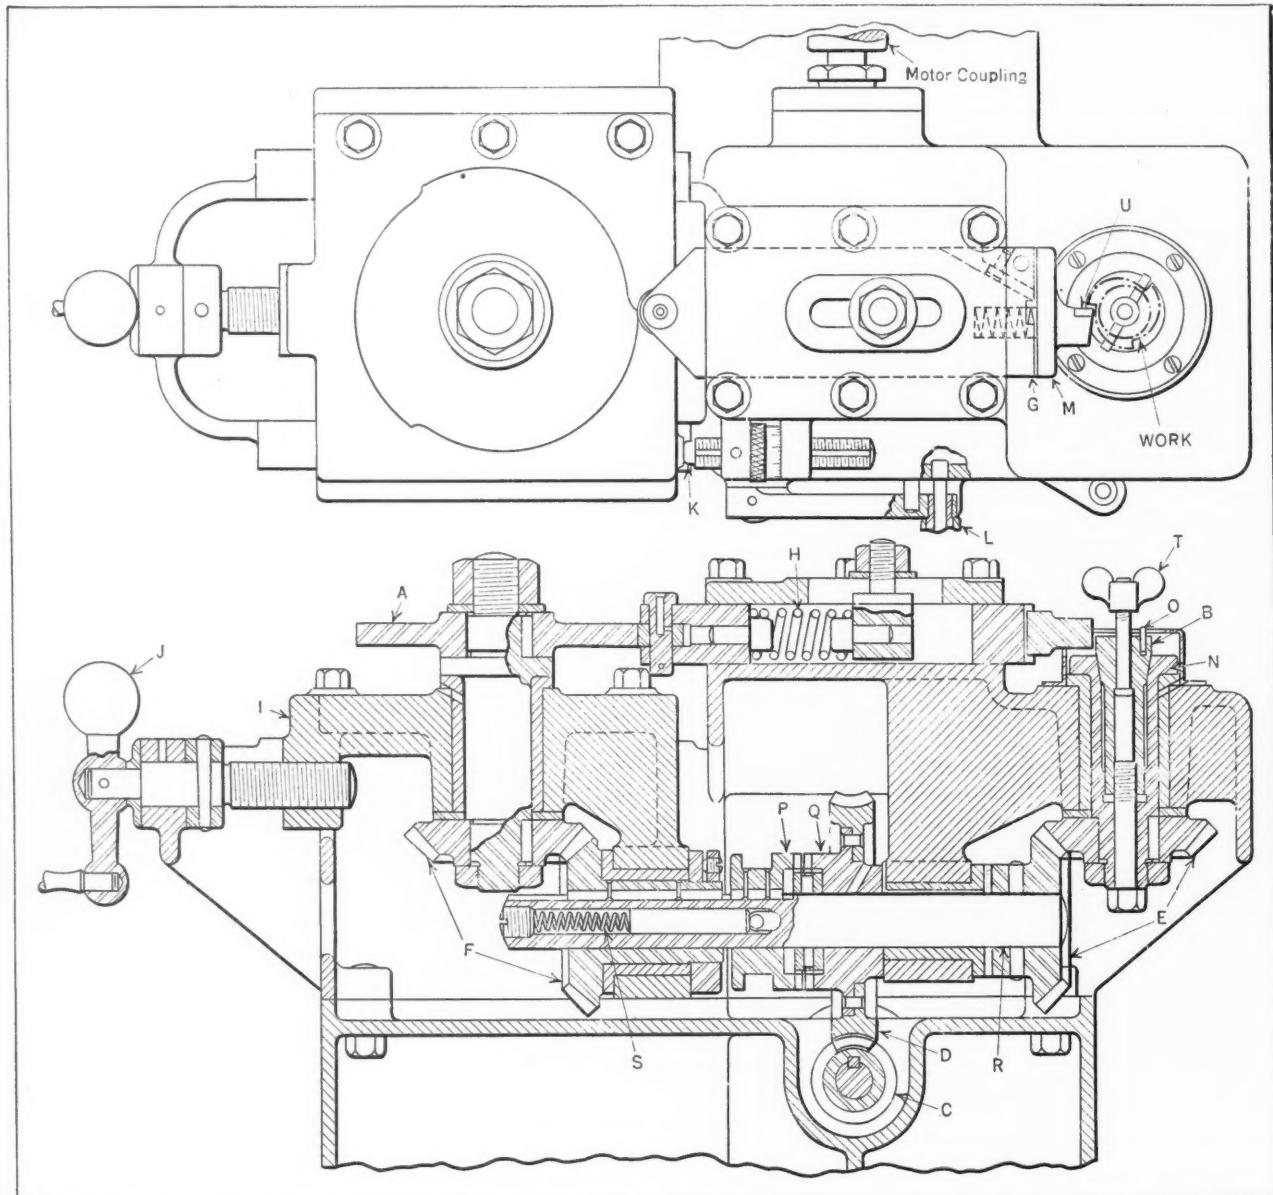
Machine for Burnishing the Lobes of the Cam Shown in Fig. 2
